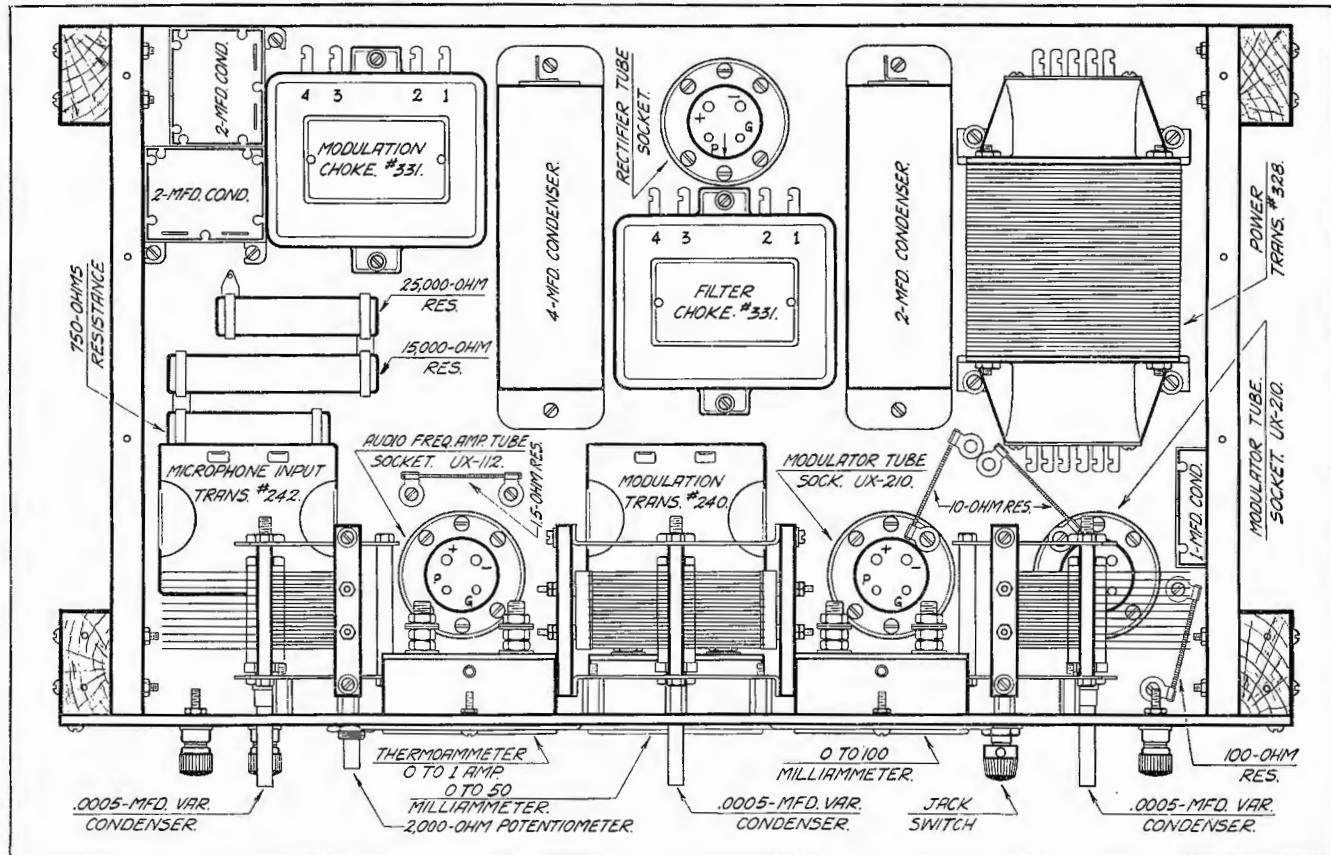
The baseboard layout shown above represents the manner in which parts should be placed on the lower shelf, where all of the power apparatus is located
